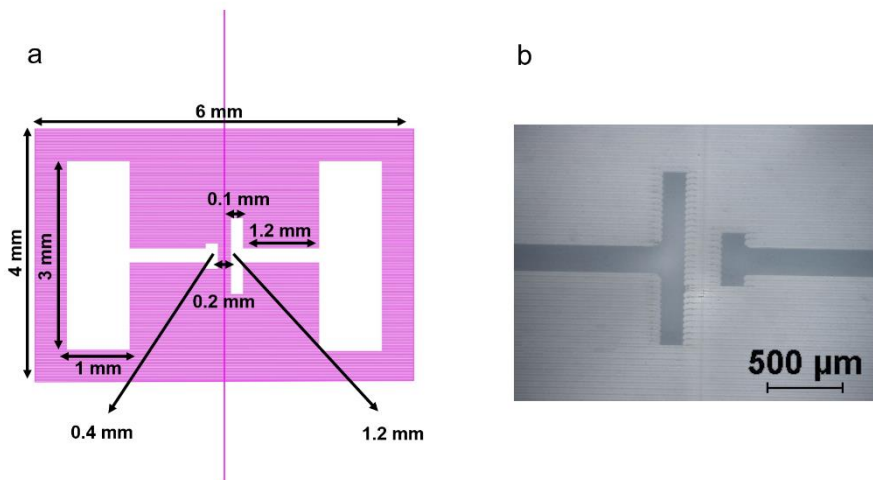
a) CAD drawing of the sensors. Fuchsia lines represent the material removed by the laser. b) Optical micrograph of the sensor electrodes.
